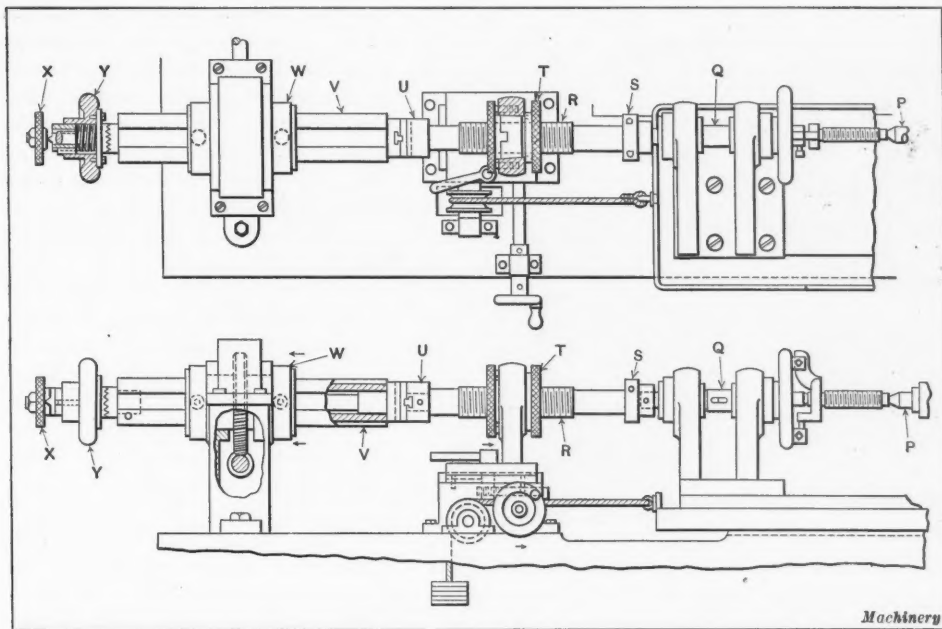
Arrangement for controlling Lead of Thread on the Harris Thread Grinding Machine
